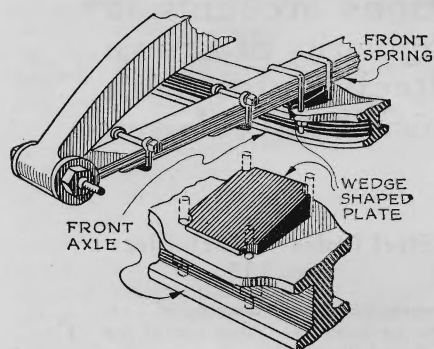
Metal wedge, bolted between spring and spring seat on axle, will improve steering.
